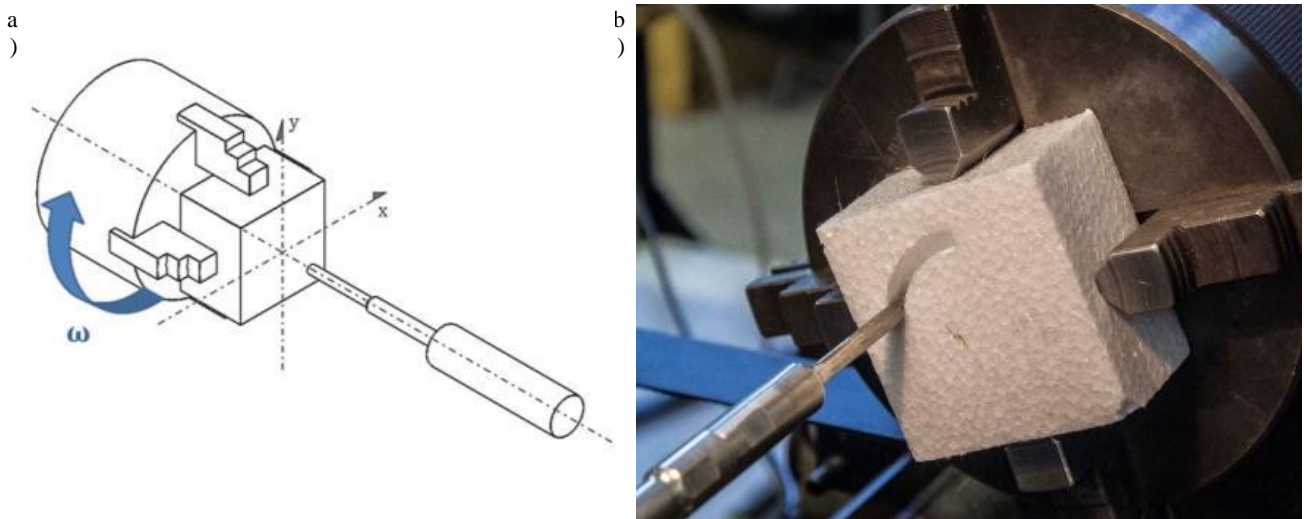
Scheme of the setup for the ultrasound machining on lathe (a) and the real setup (b). Because of the dimensions of the sonotrode, the only operation possible was the face grooving.
